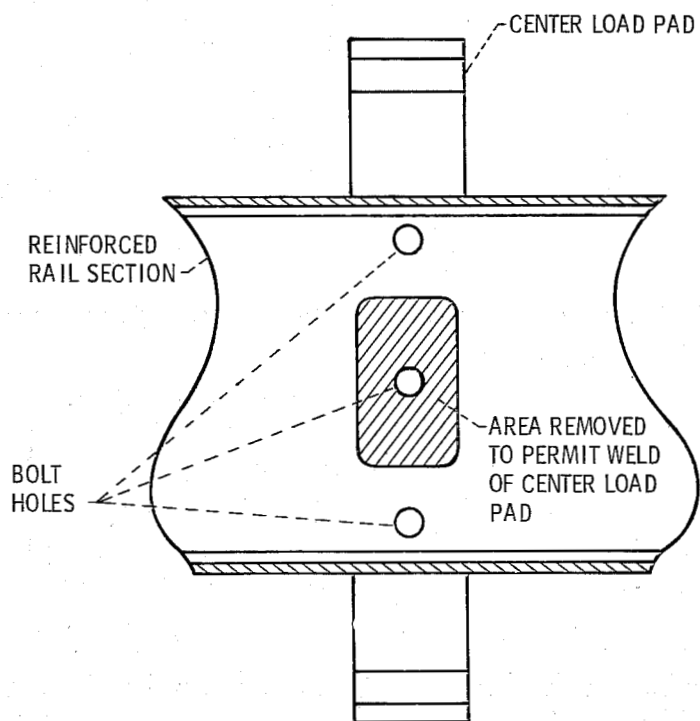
Sketch of cutout for welding center load pad.
